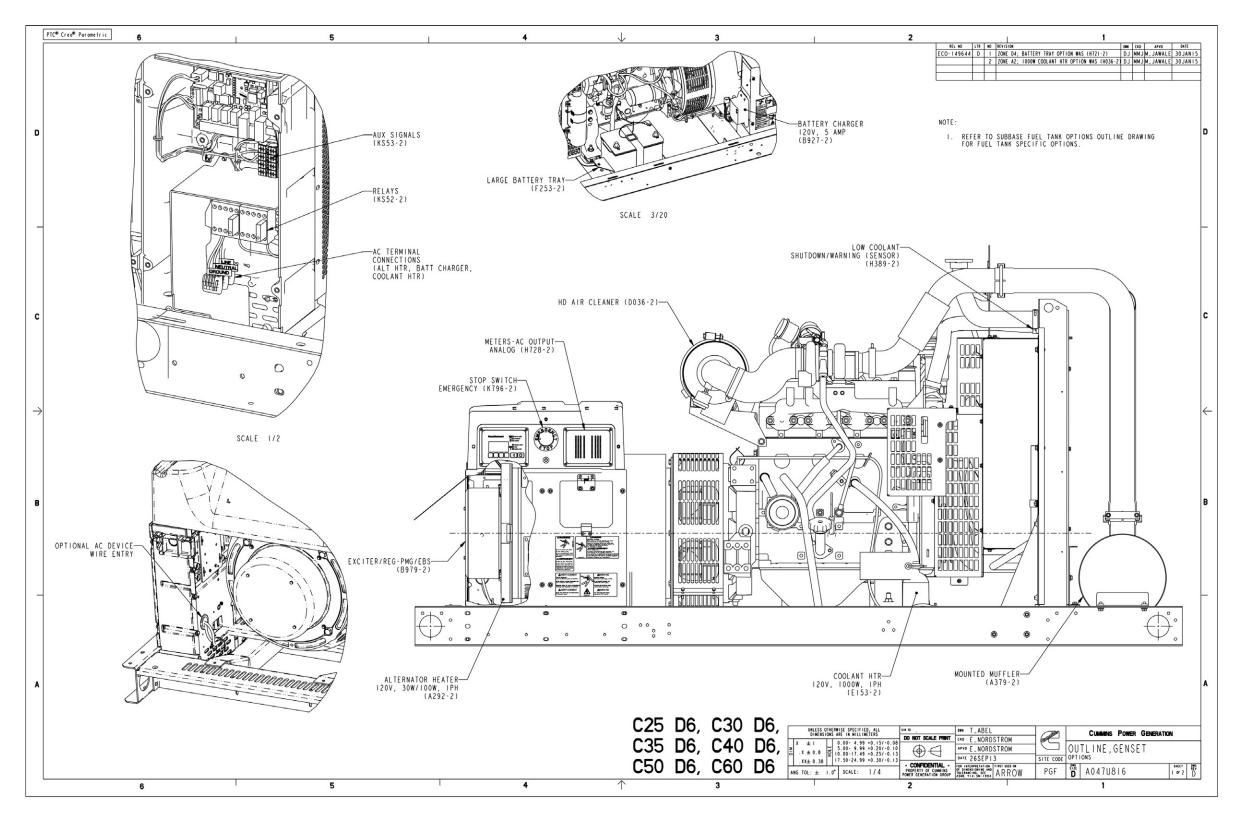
OUTLINE DRAWING (SHEET 1 OF 2)
